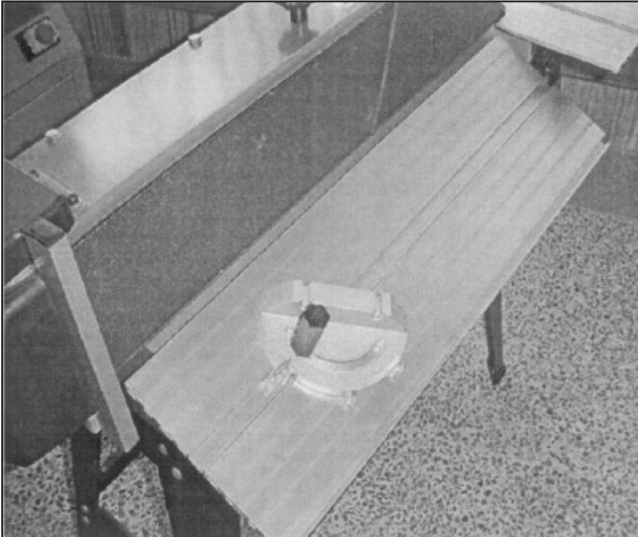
The sanding table can be adjusted and locked in the range of 90° to 135°.
